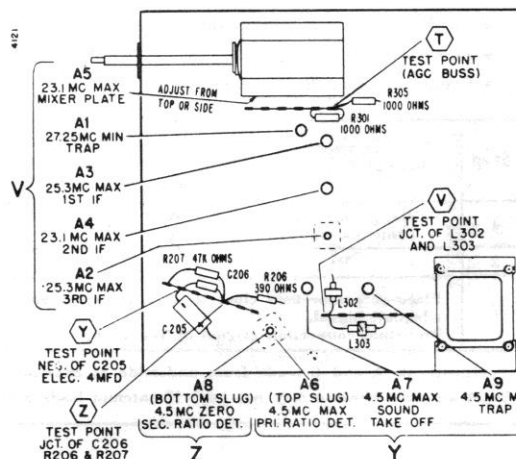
Bottom View of Chassis Showing Test Point Connections and IF Alignment Data.
